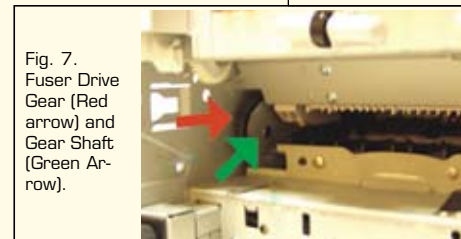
Fuser Drive Gear (Red arrow) and Gear Shaft (Green Arrow).
